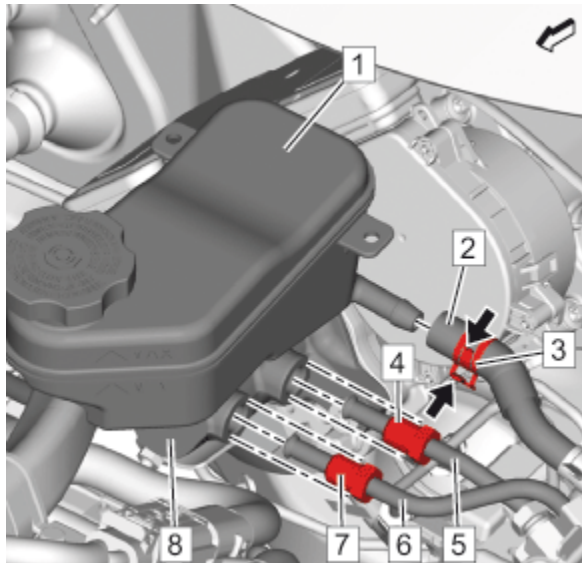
Brake Master Cylinder Reservoir Hose And Brake Pressure Modulator Valve Secondary Pipe
